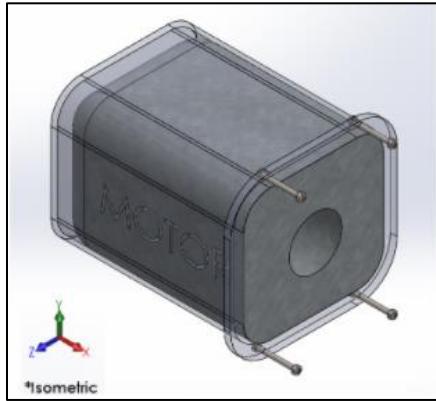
A Motor & Its Casing Is Supported By 4 Fasteners
